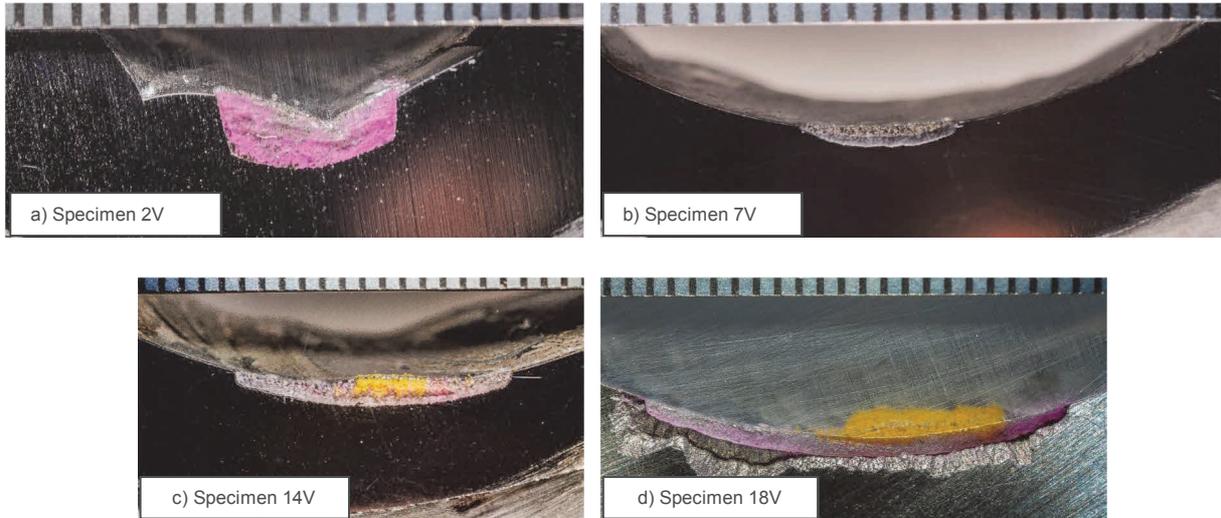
Appearance of the inner surface of tubular bodies with detected defects (cross-section of defects)
